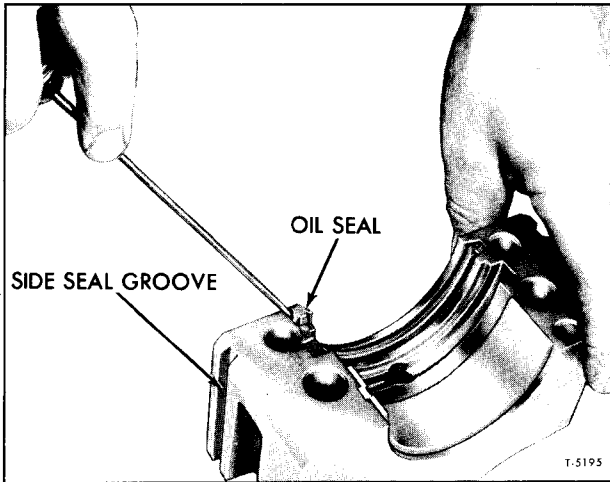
Removing Seal Lower Half from Bearing Cap gasket in place at cylinder block and front cover. Tighten bolts evenly to 10 to 15 foot-pounds torque. Overtightening the bolts will distort the oil pan flange.
